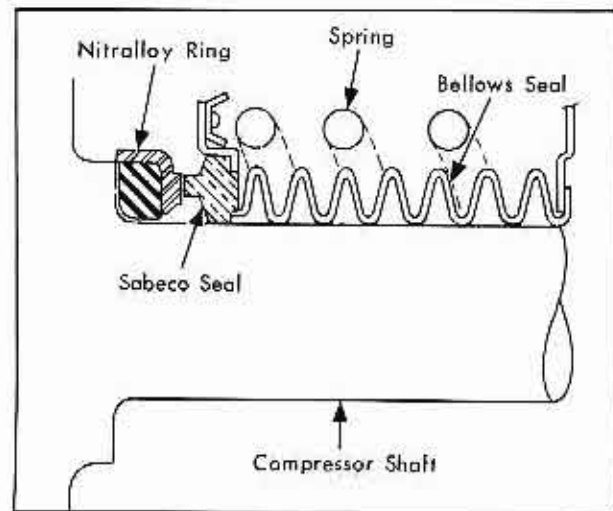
A-27 Location of Nitralloy Ring on Compressor Shaft
